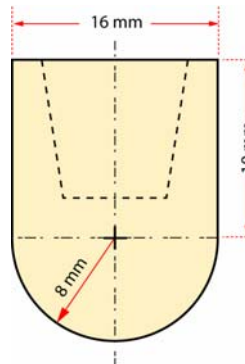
Schematic of type-F hemispherical face electrode (ISO 5821) used in the welding experiments of sandwich sheets.
